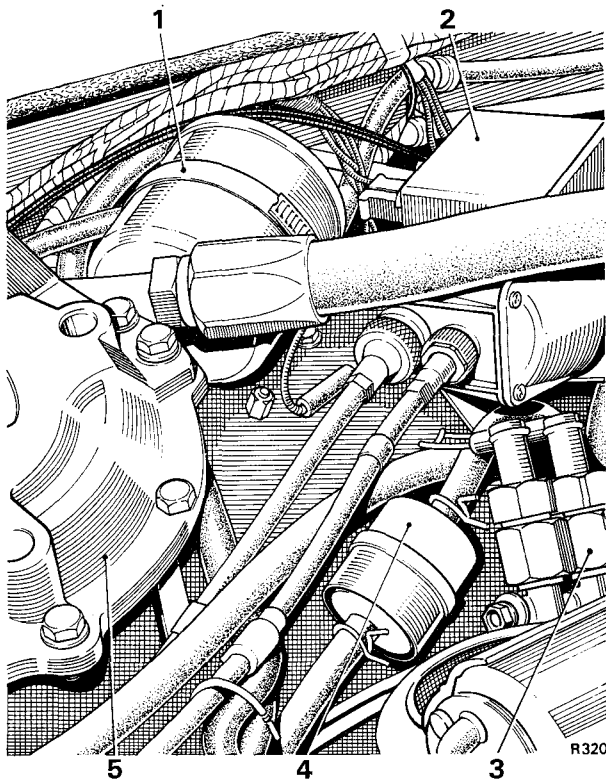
POSITION OF MIXTURE WEAKENING DEVICE FILTER AND PURGE LINE FILTER
